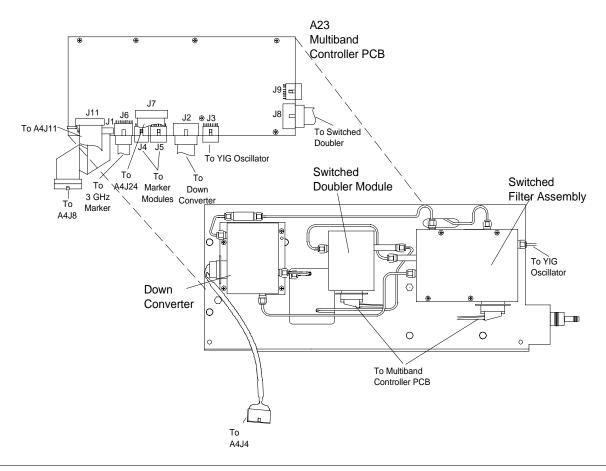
Models 54154A through 54169A RF Deck Parts Location (Internal Side Detail)
